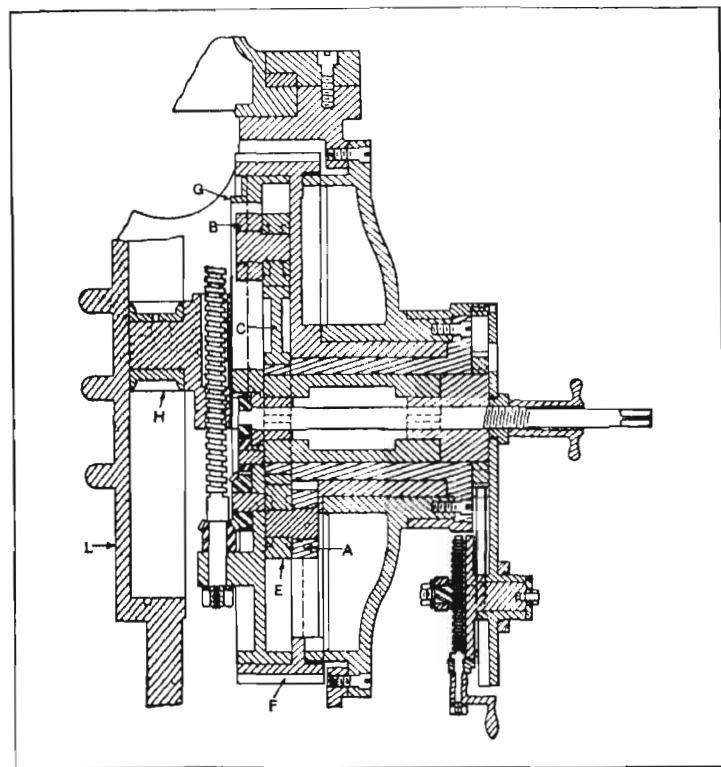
Crank-operated Quick-return Motion Designed to Give a Uniform Forward Speed
